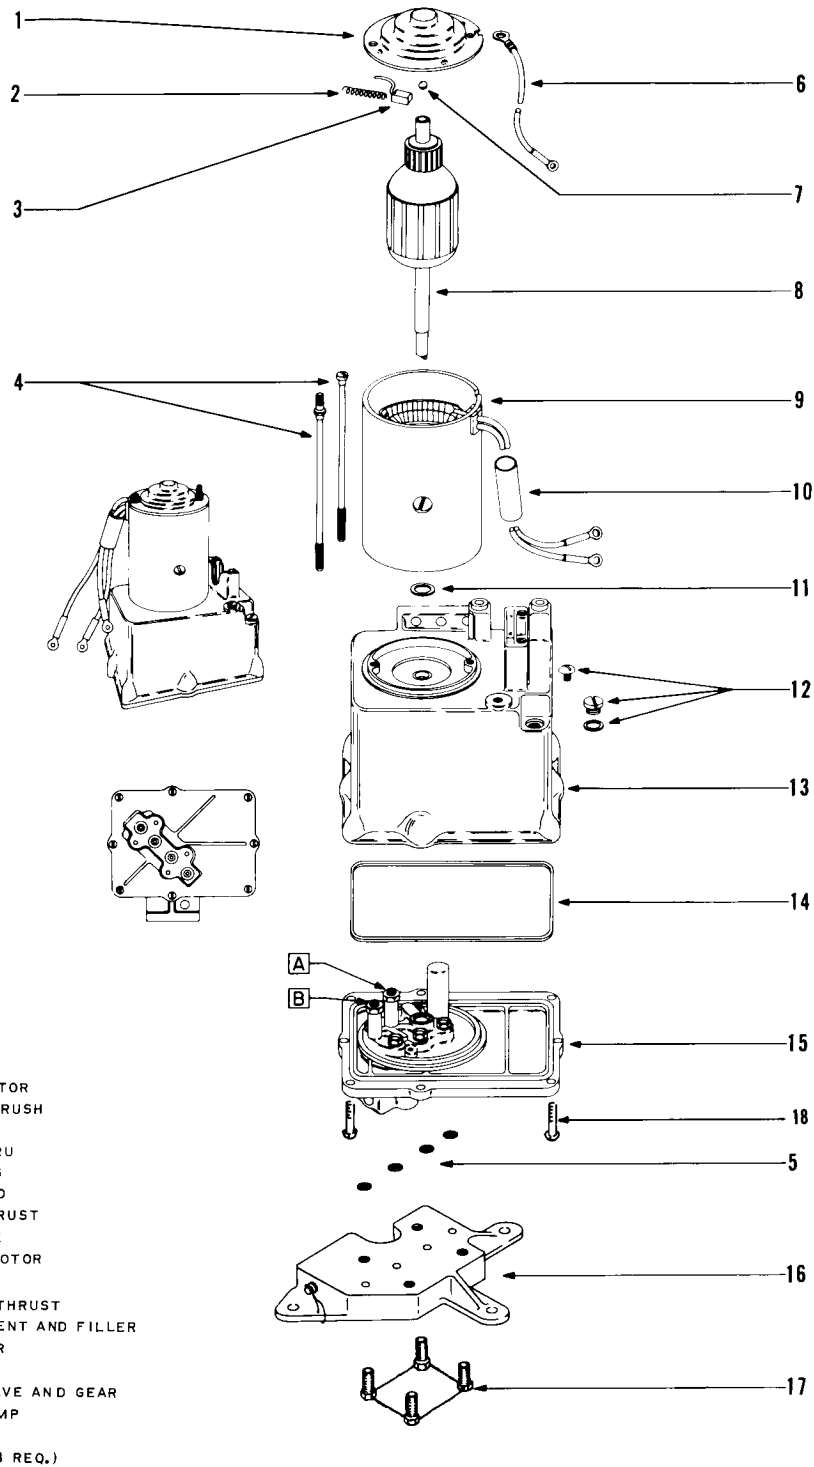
Hydraulic Pump/Reservoir, Exploded View
